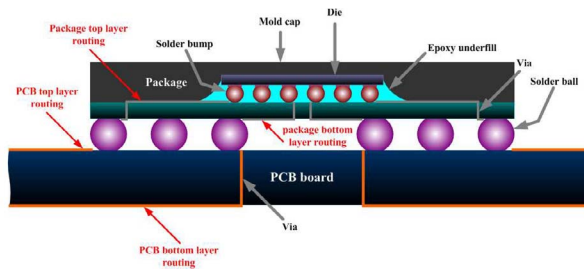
Simplified cross-section of a flip-chip package which is mounted on PCB board.
